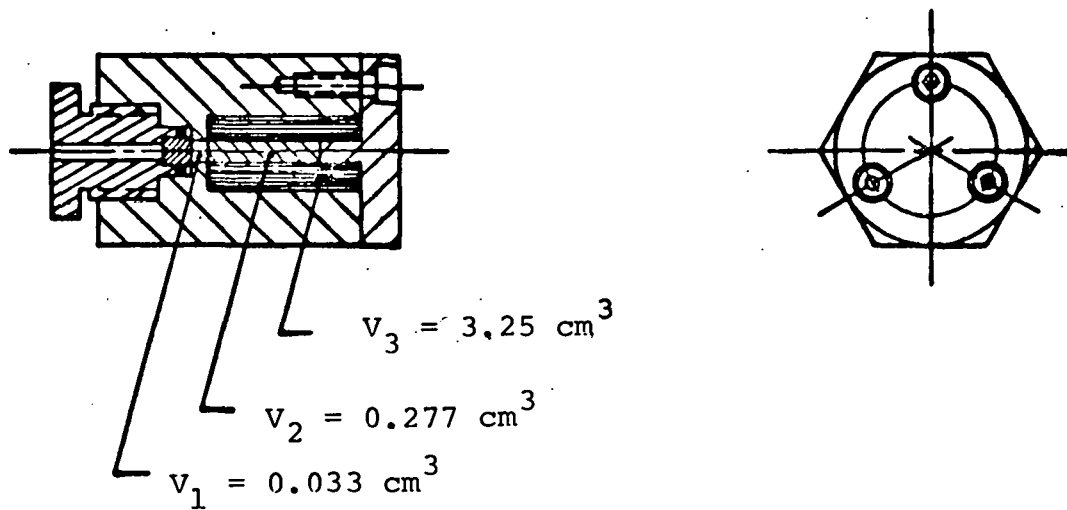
Igniter Test Fixture to Allow Changes in Confinement
